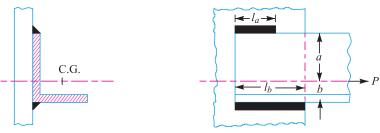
Axially loaded unsymmetrical welded section
